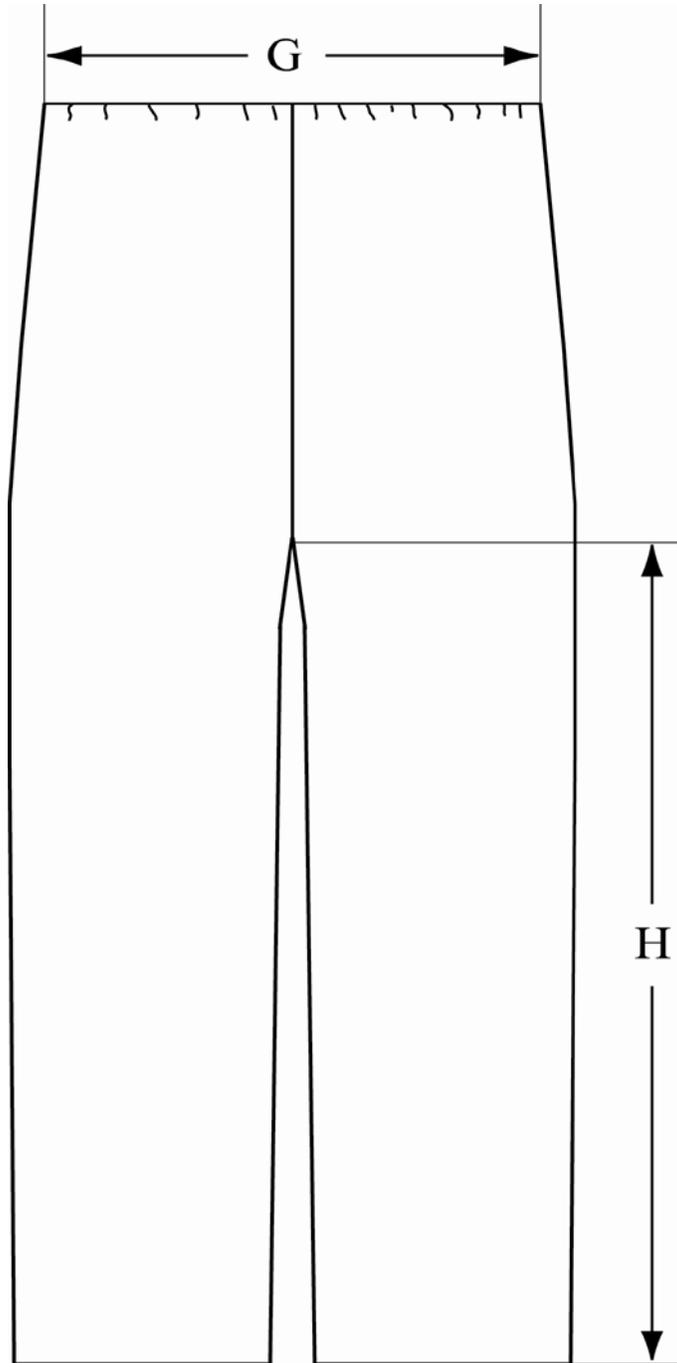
Otto Fuel protective garment, Type III – trousers
